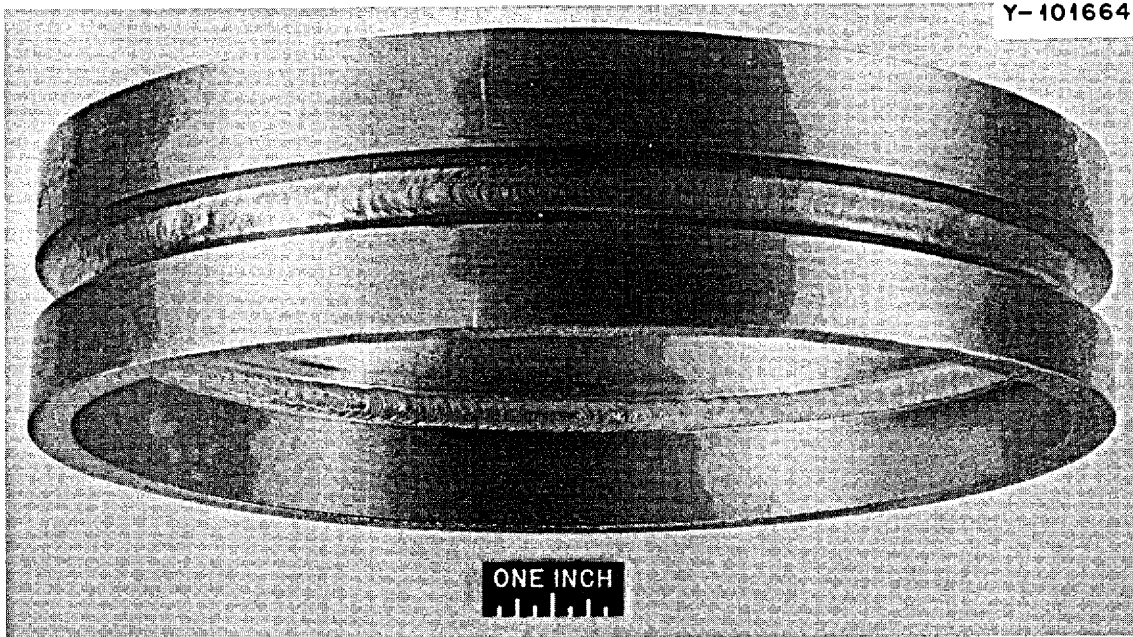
Root and Filler Pass Made on Heavy-Wall 347 Stainless Steel Pipe with Y Insert and with Pipe Vertical.
